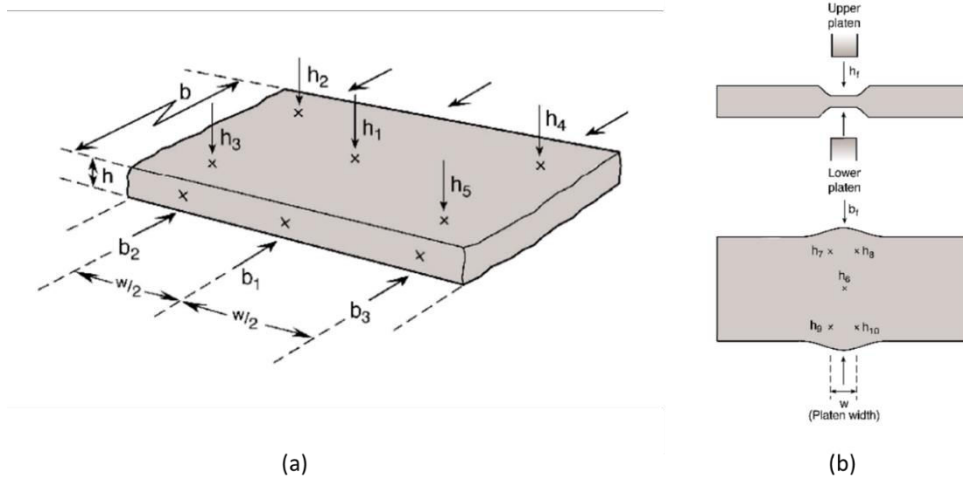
(a) Test piece geometry before testing and approximate dimensional. (b) schematic diagram of test piece after testing and approximate dimensional measurement positions [71]
